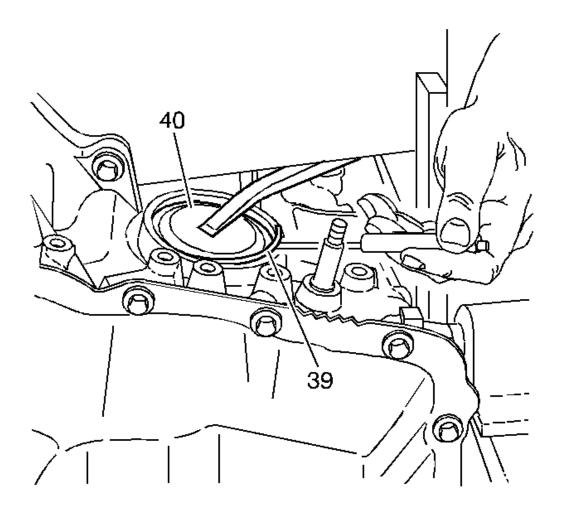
Identifying Reverse Servo Cover And Snap Ring Courtesy of GENERAL MOTORS COMPANY
